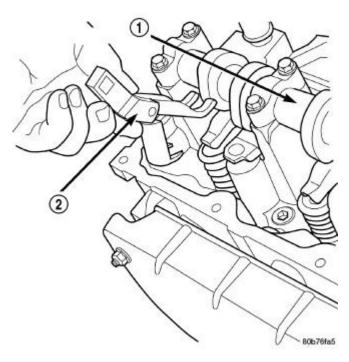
Removing/Installing Rocker Arm Courtesy of CHRYSLER LLC
